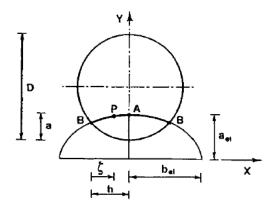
, Elliptical-arc surface flaw in a round Shaft: geometrical parameters.
